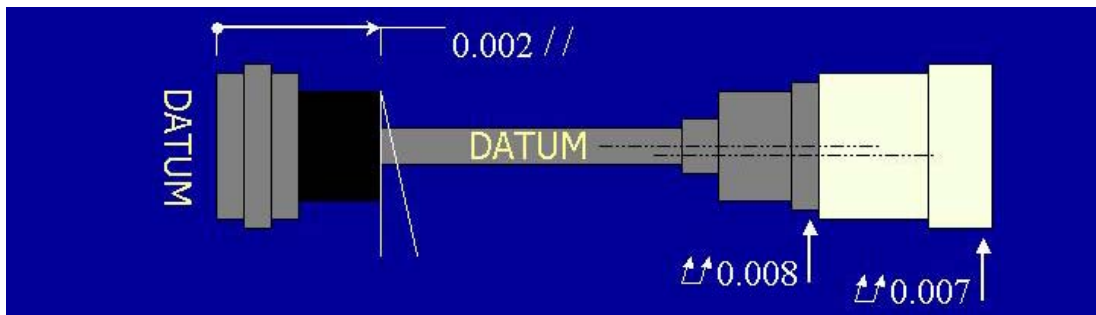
Parallelism and FIM readings of the forward assembly.
